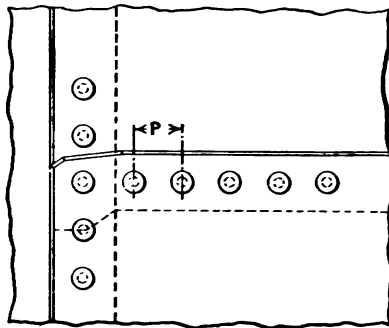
EXAMPLE OF LAP JOINT, LONGITUDINAL OR CIRCUMFERENTIAL, SINGLE-RIVETED
